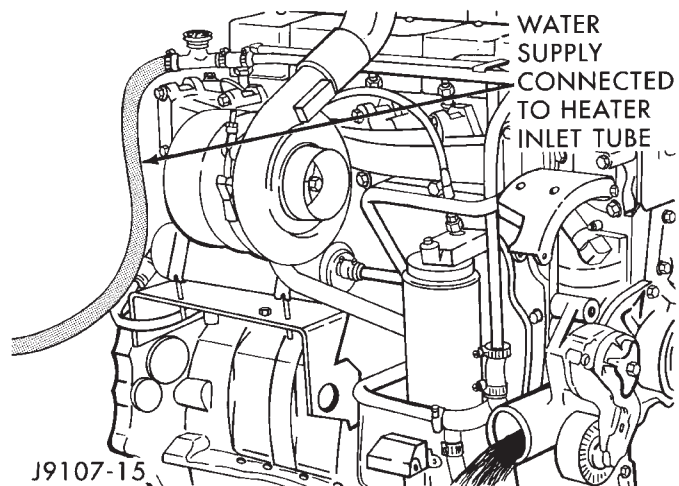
Typical Reverse-flushing—5.9L Diesel
